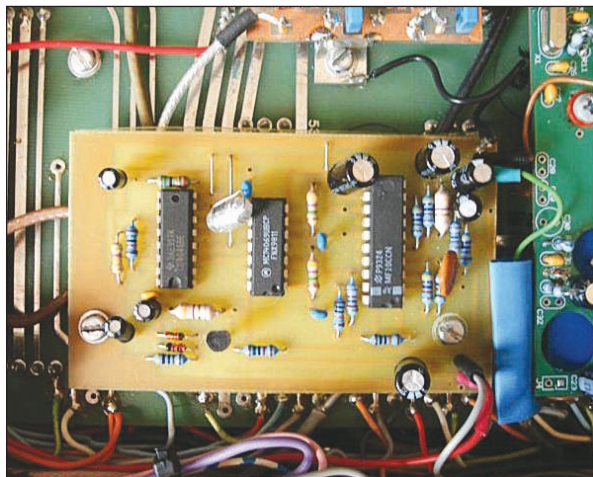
Notch filter PCB assembled on to the parent board of the TR-7.
